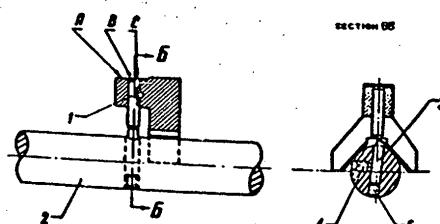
CUTTING TOOL ADJUSTMENT FOR BORING CONNECTING ROD BEARING
